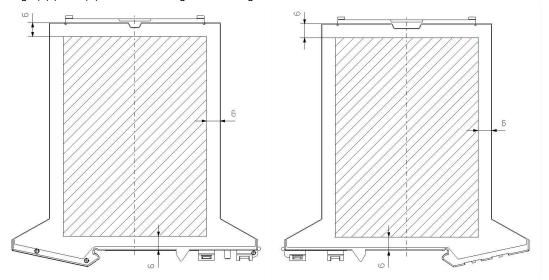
Manufacturing tolerances according to DIN ISO 2768-m
